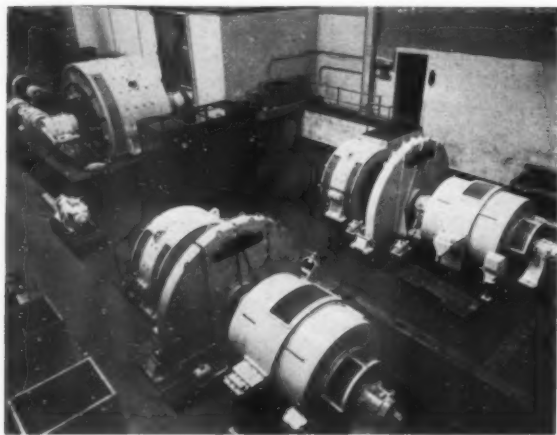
No. 2 hot mill main drive motor and its two flywheel motor generator sets.
